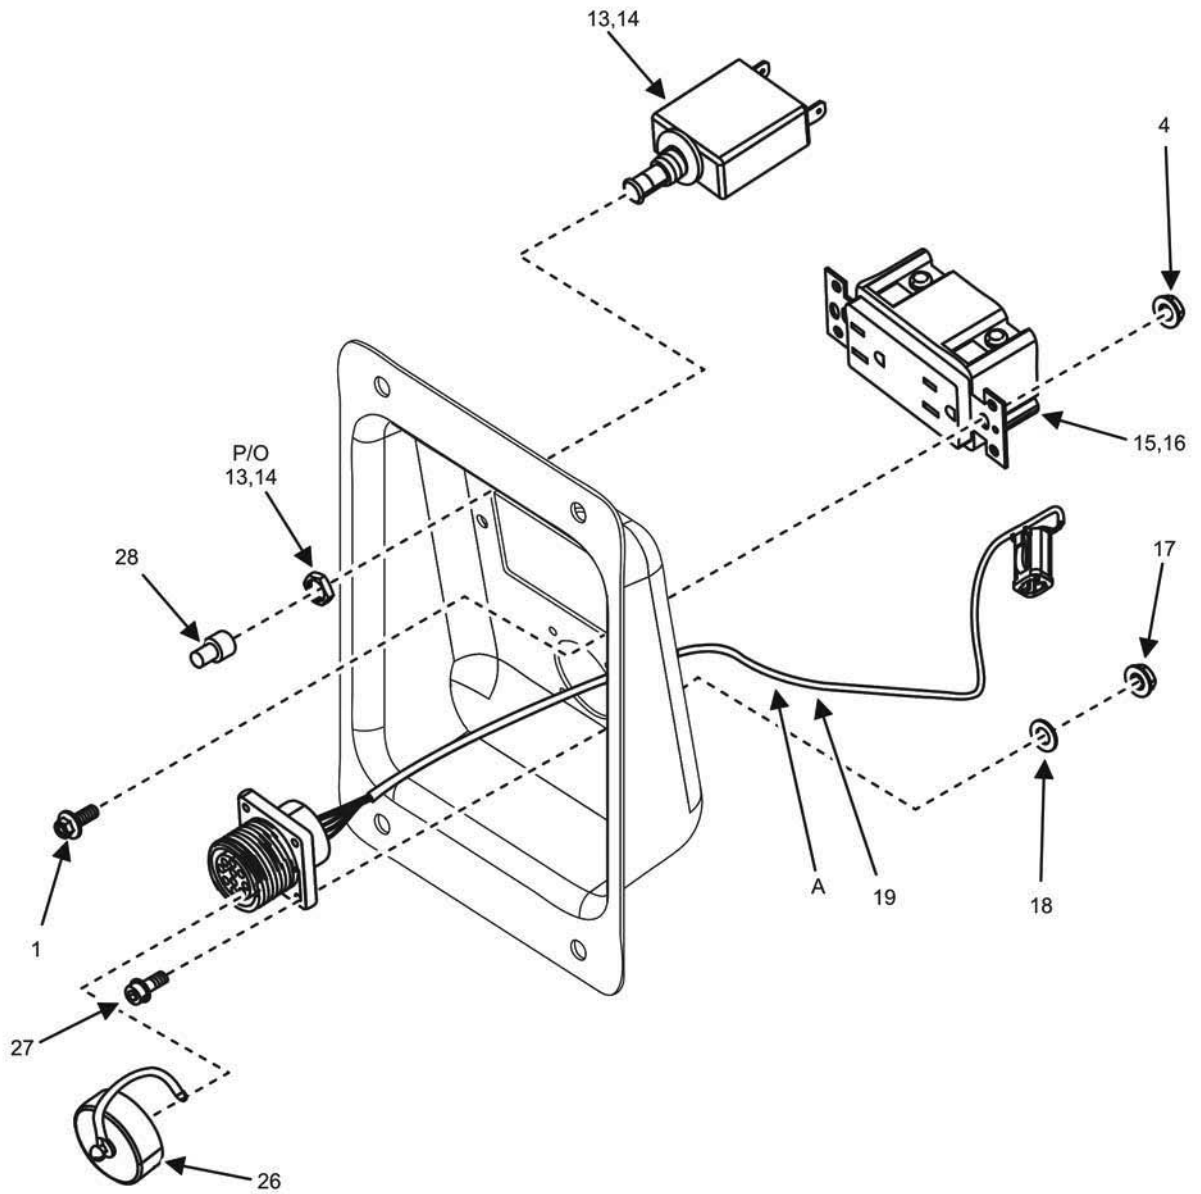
Convenience Receptacle Assembly (Sheet 2 of 7).
